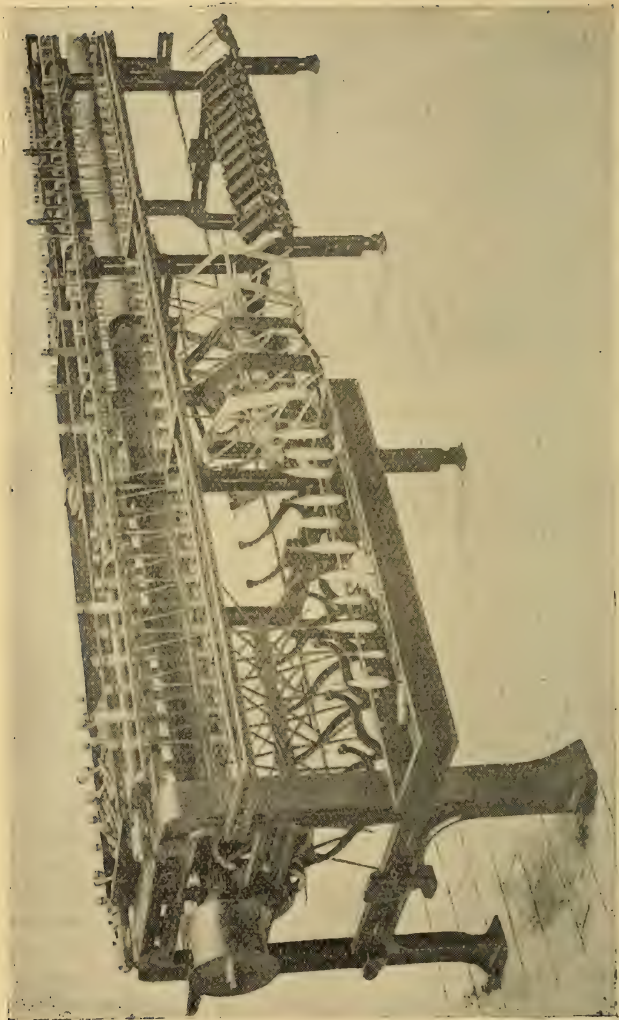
CUP PIRN WINDING MACHINE, MOUNTED FOR WINDING FROM COILS, HANKS, AND WINDERS' BOBBINS.
